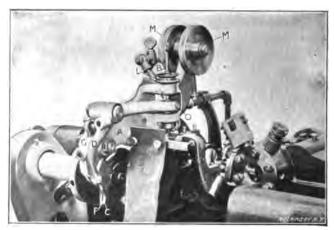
Front View of the Index Drilling Attachment, placed on a No. 00 Brown & Sharpe Automatic Screw Machine
